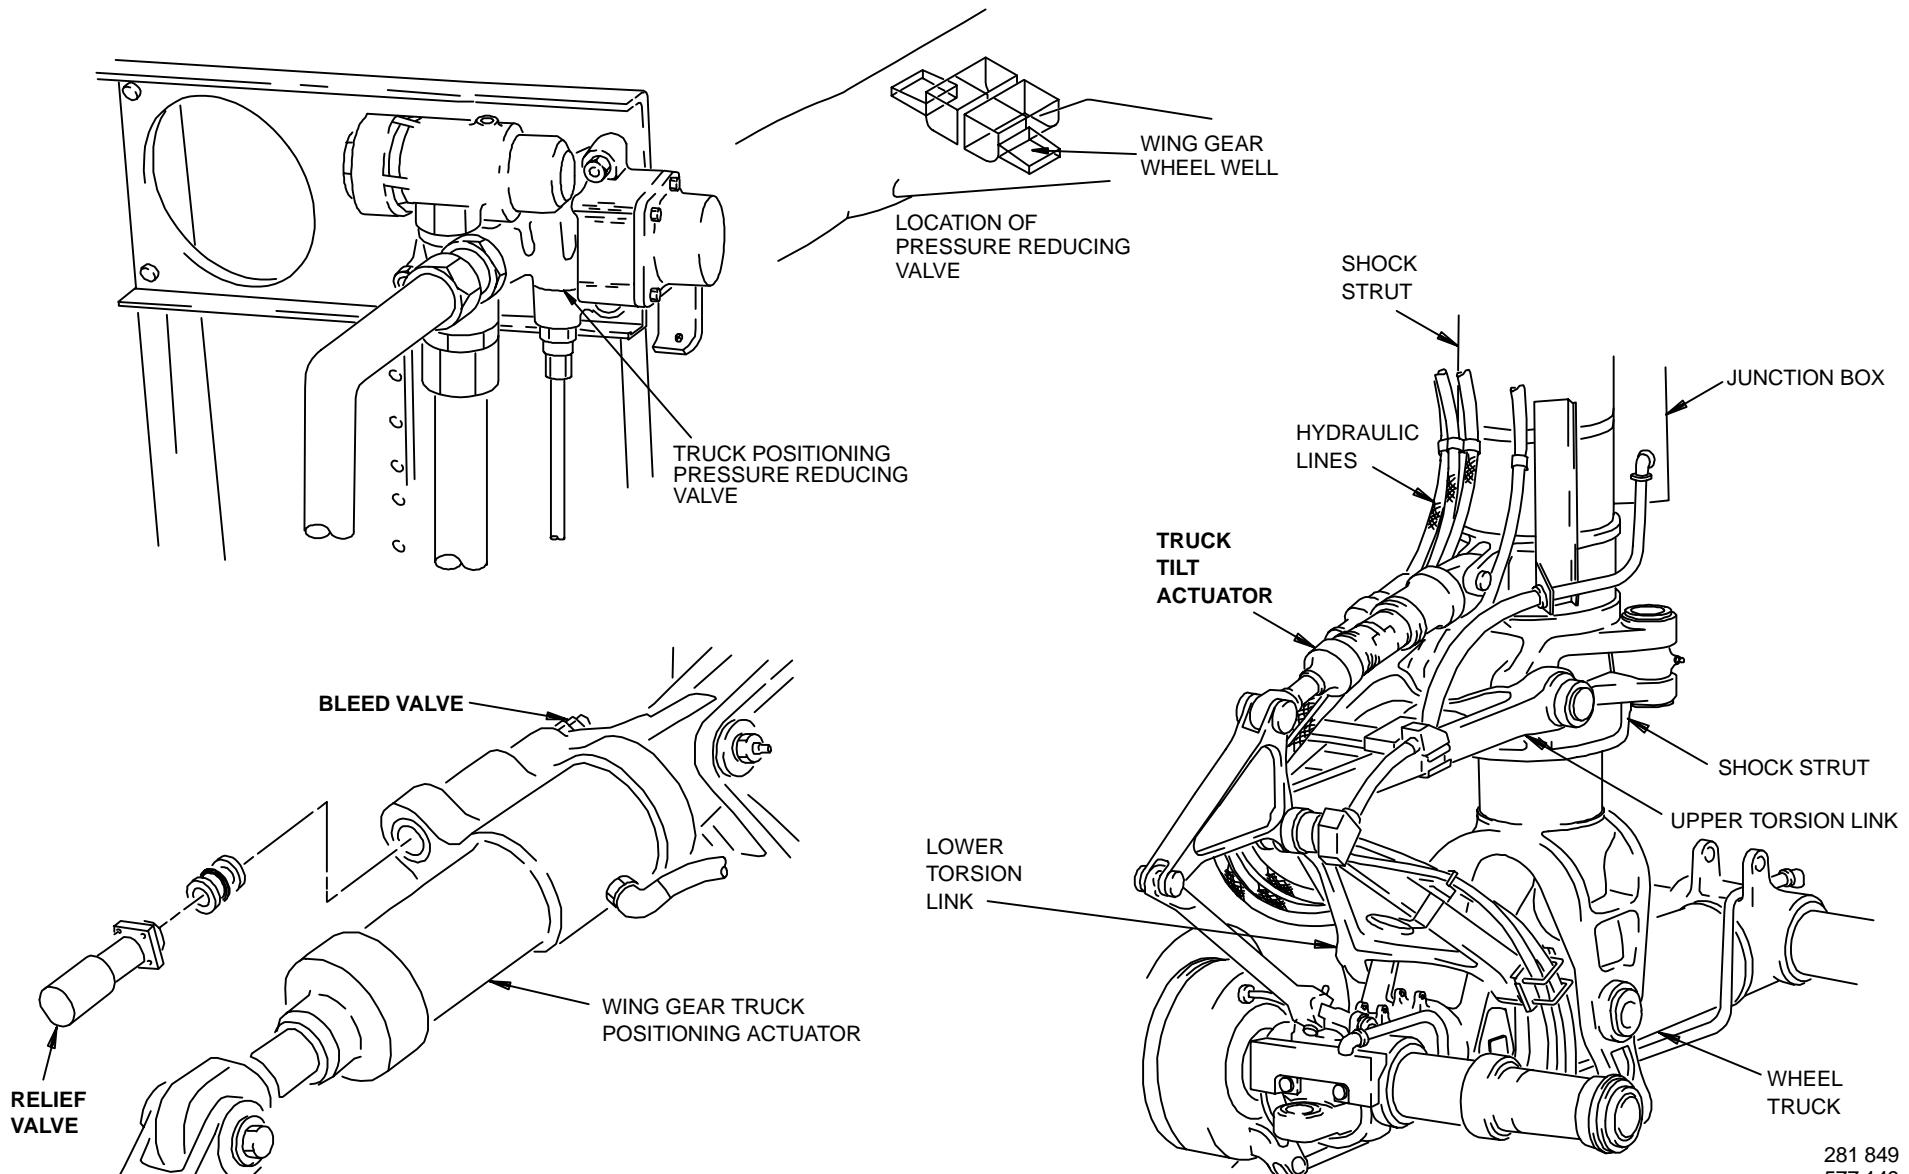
WING GEAR TRUCK TILT COMPONENTS
